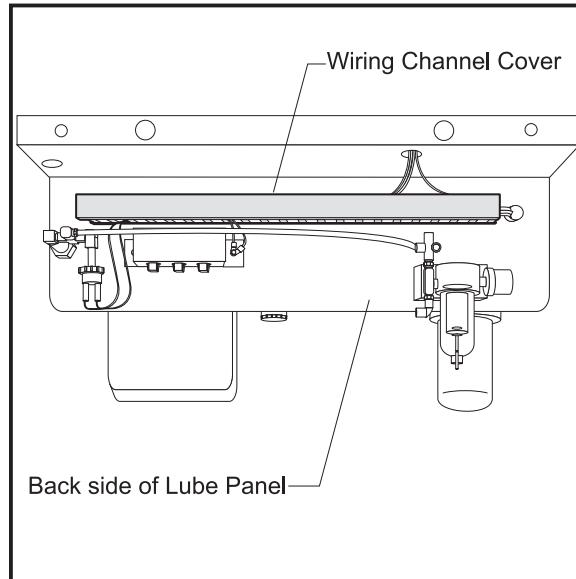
Top view of spindle lube/air solenoid assembly.
